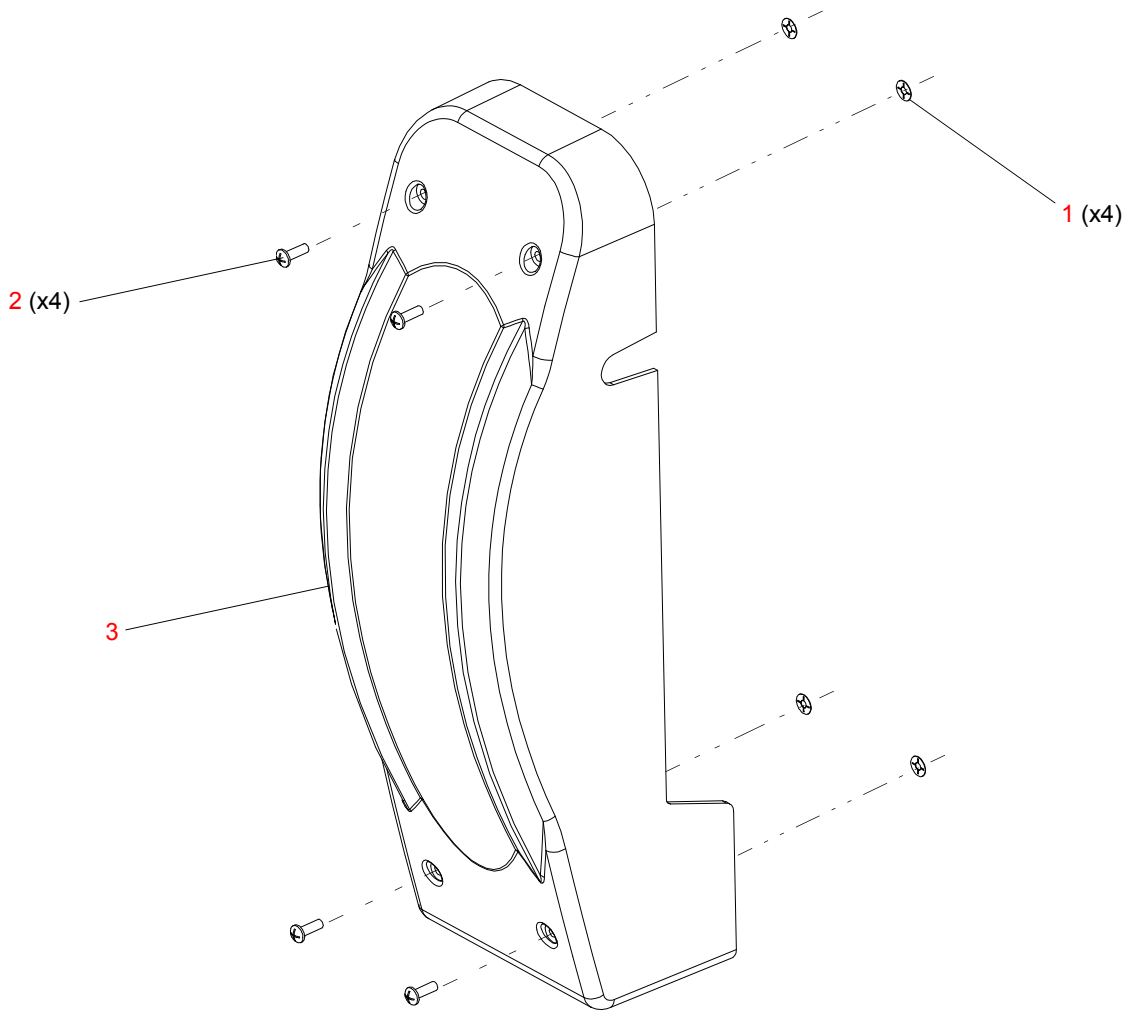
VL4000 Yoke Arm Cover Assembly
